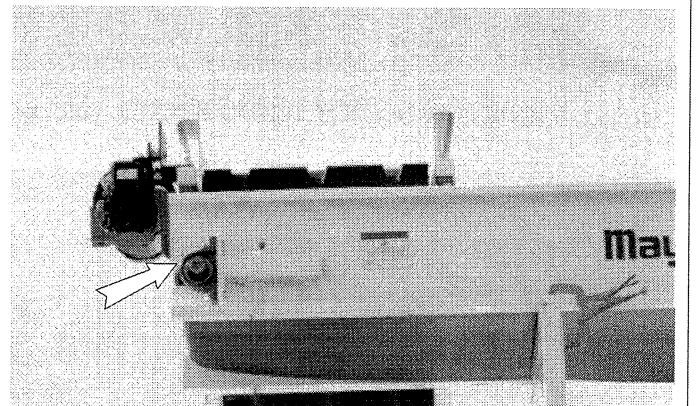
CROSS CONVEYOR DRIVEN SHAFT
